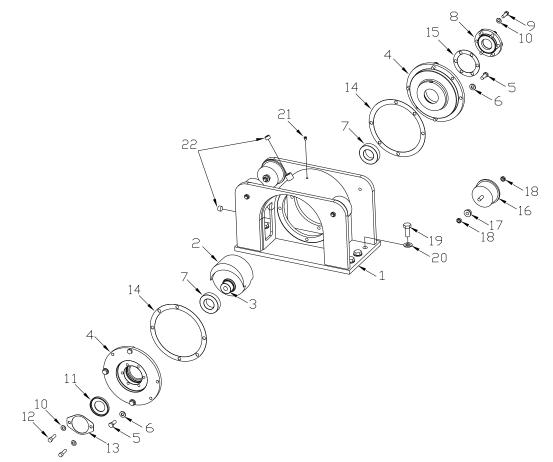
Model 500 Dynamic Assembly & Suspension System (Configured with bolt-on compaction plate)
